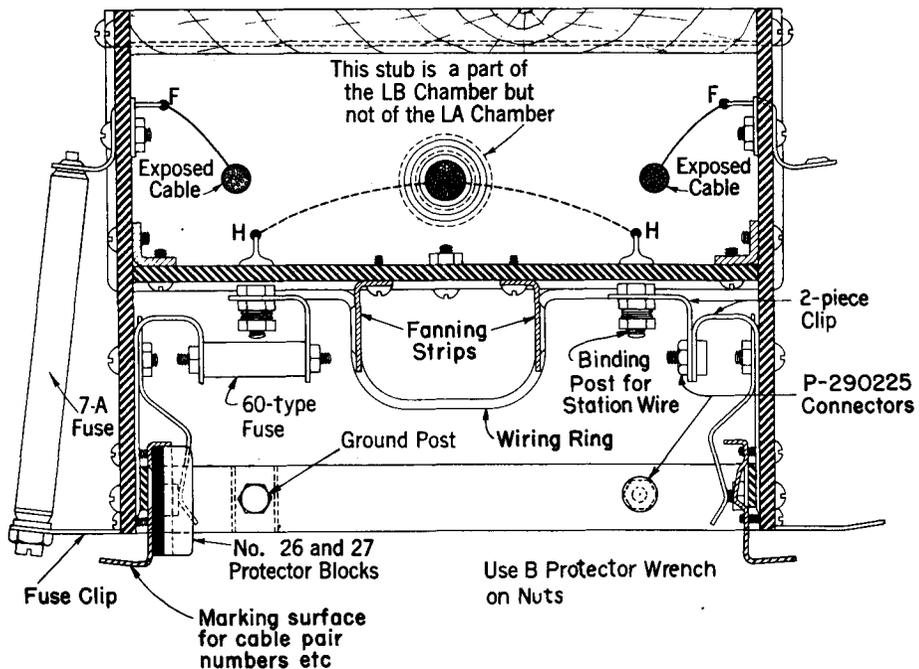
Cross-sectional View of LA- or LB-type Fuse Chamber
